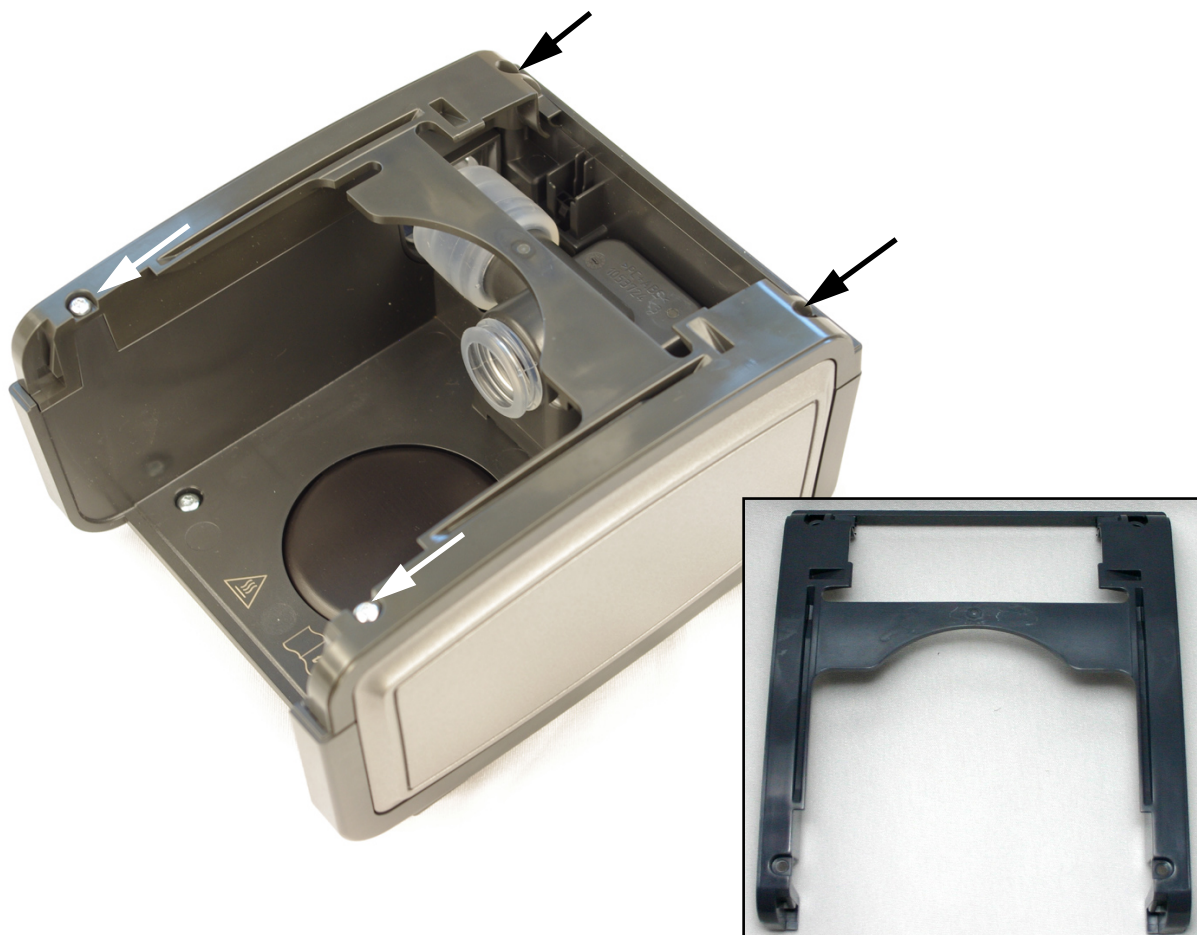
HUMIDIFIER TOP HOUSING
